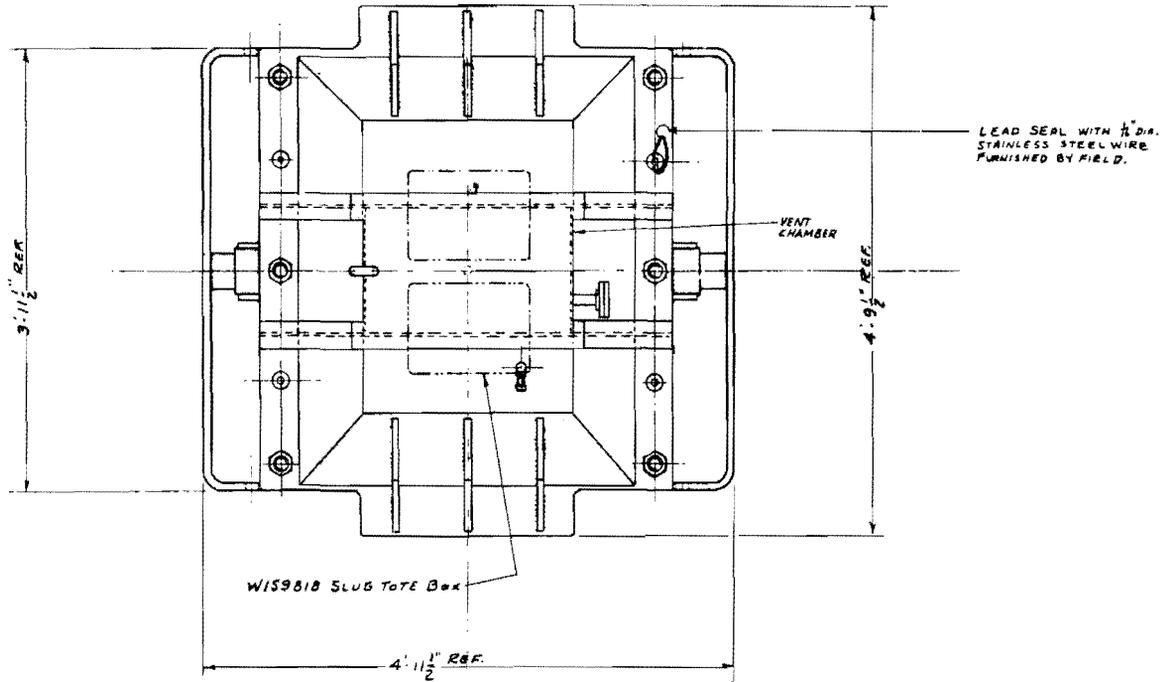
SLUG SHIPPING CASK ASSEMBLY
